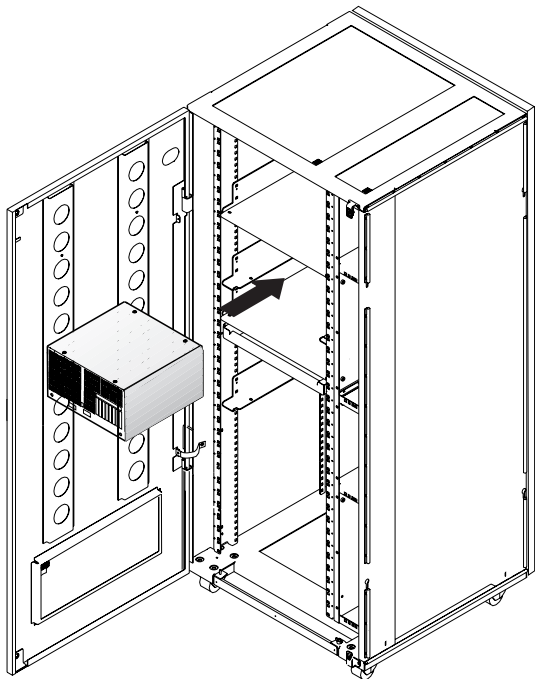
Installing the SP Unit type 3172 (Rear Side).
